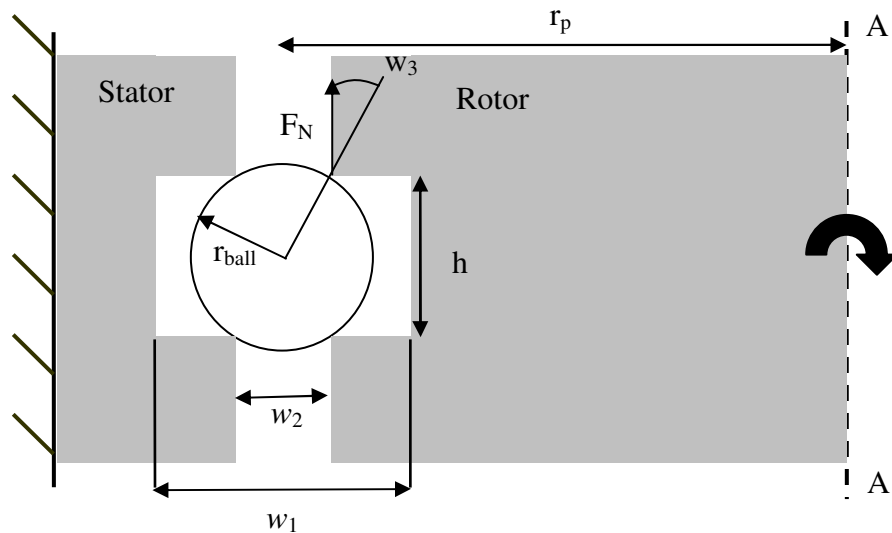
Schematic showing the point-contact microball bearing design. The rotational axis of the rotor is shown by the A-A' dashed line.
